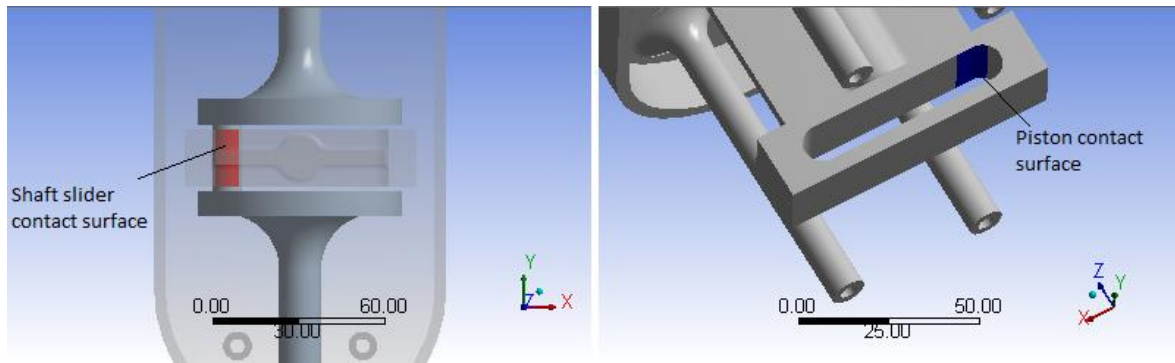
Shaft slider (left) and piston contact (right) regions.
